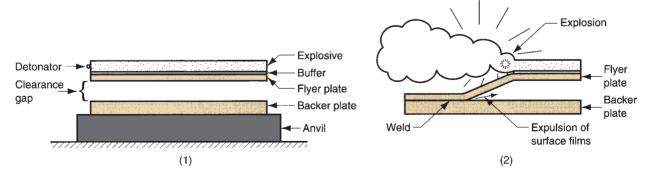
Explosive welding (EXW): (1) setup in the parallel configuration, and (2) during detonation of the explosive charge.
